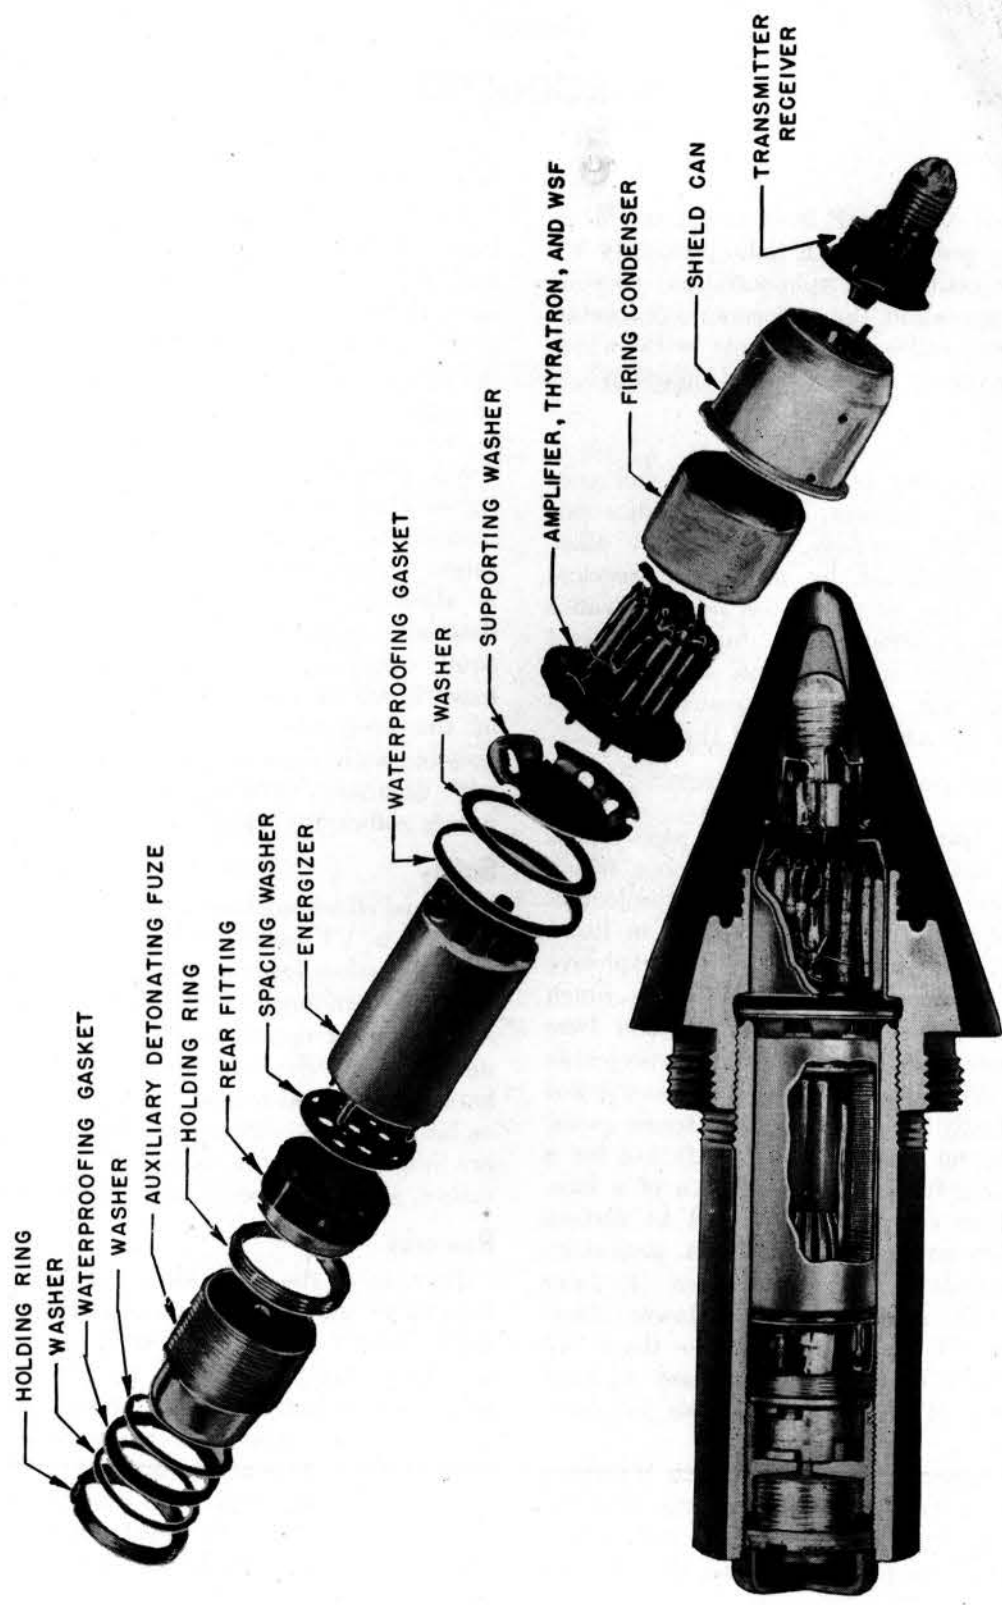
Cutaway and exploded view of a typical VT fuze (VT Fuze Mk 53 Mod 5).
